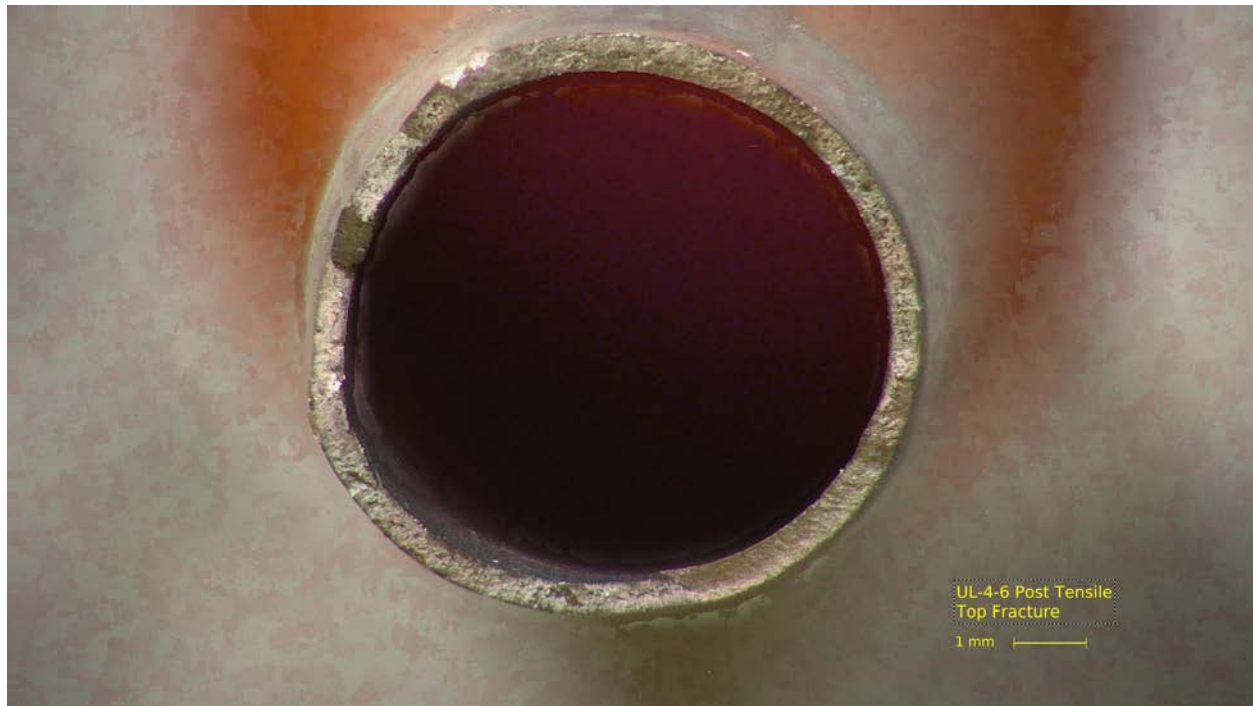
Post-Tensile Image Top Fracture for UL-4-6
